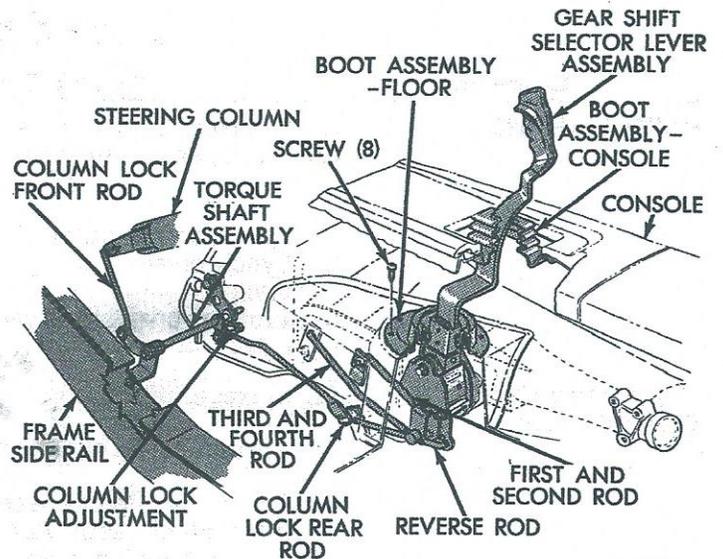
Gearshift Mechanism—Assembled (Typical for Dart)
